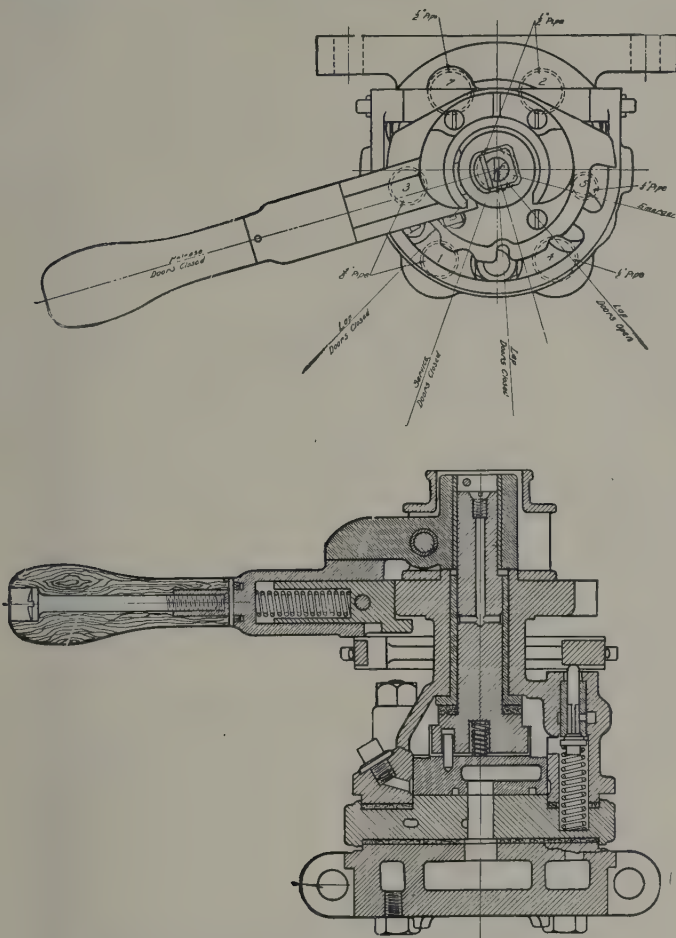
M-28 Brake Valve with Sanding Feature.
